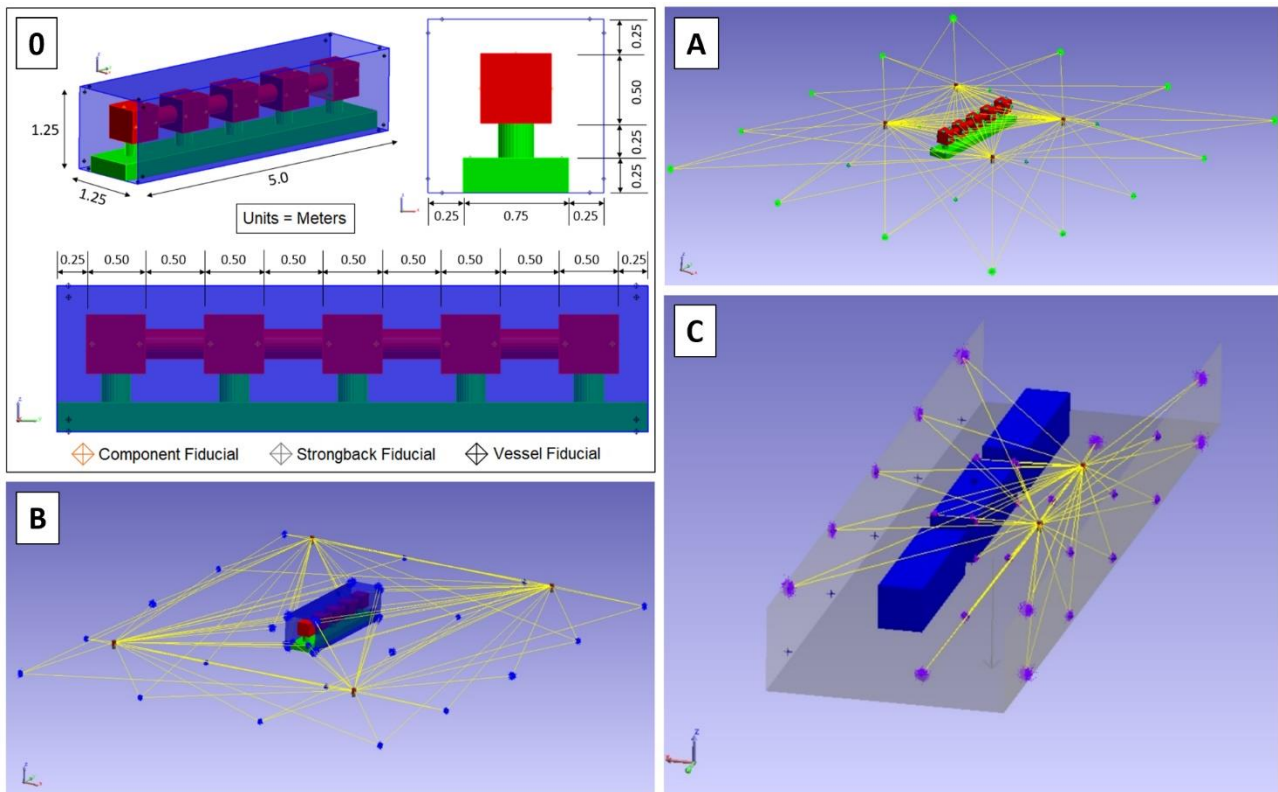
[0] Simulation Assembly Model, [A] Component Alignment to Strongback, [B] Cavity String/Strongback Insertion to Vacuum Vessel, [C] Placement of Vacuum Vessel Inside Tunnel.
